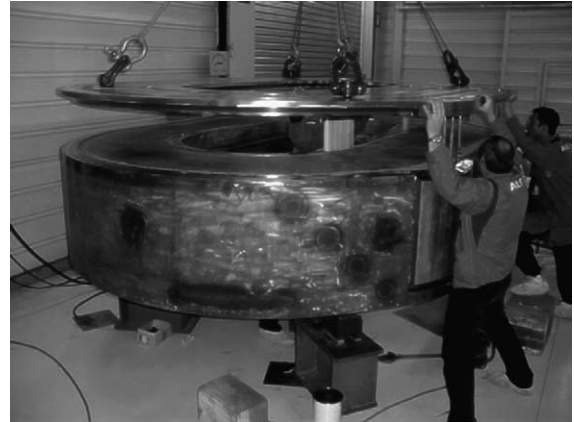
The winding pack in the stainless steel case. After filling the gap between the two with silica sand the cover was placed on top and subsequently welded.
